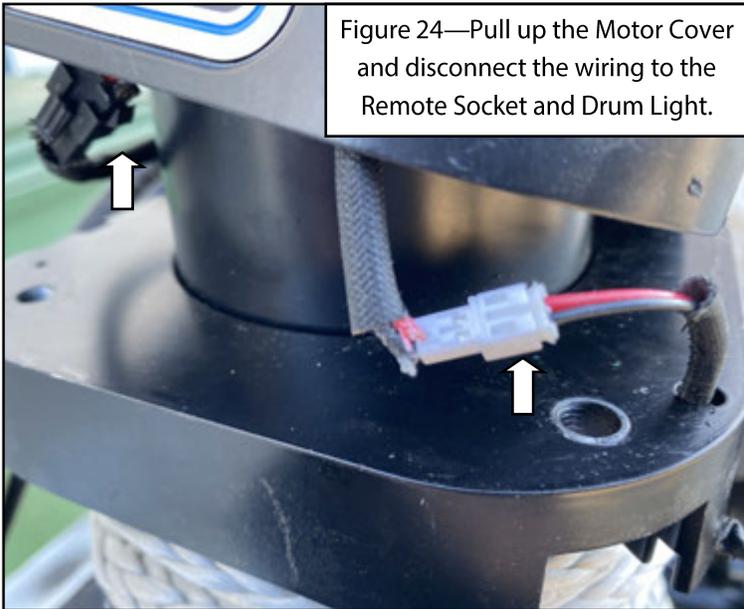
Pull up the Motor Cover and disconnect the wiring to the Remote Socket and Drum Light.
